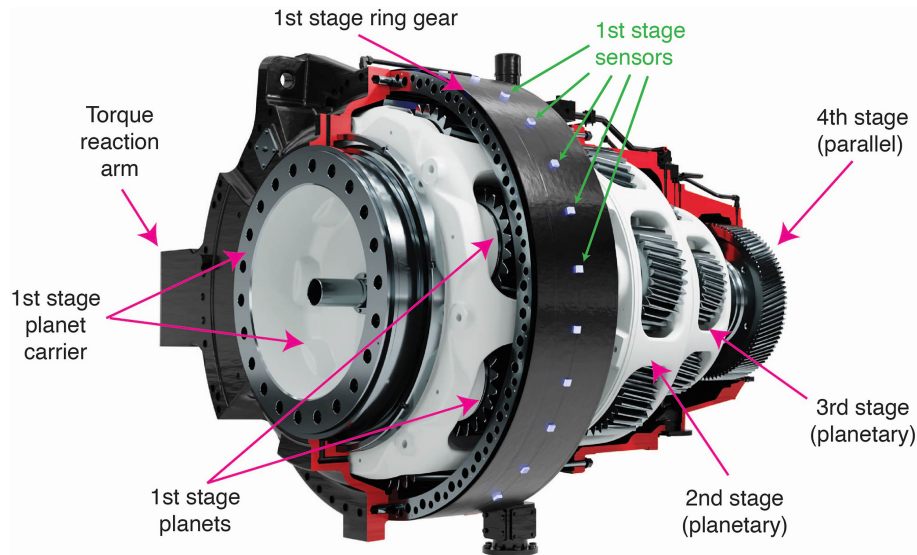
A 3D representation of the tested gearbox with fiber-optic strain sensors on the outer surface of the first-stage ring gear. Adapted from Gamesa Gearbox (<https://www.gamesagearbox.com/wind-technology/>, last access: 23 January 2024).
